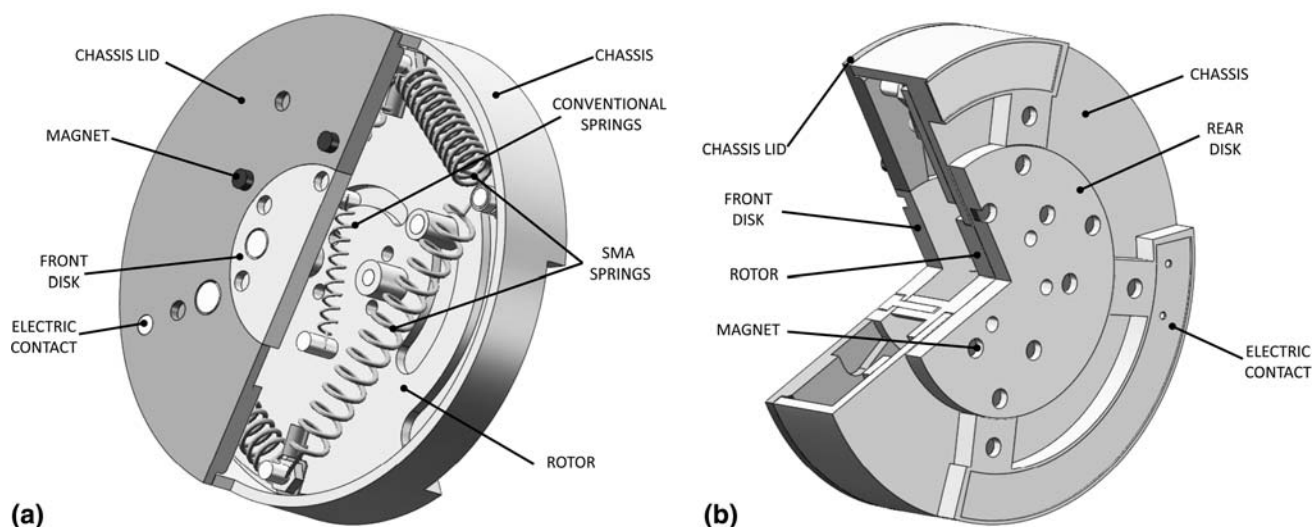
Detail design of rotary actuator: (a) front view; (b) rear view
